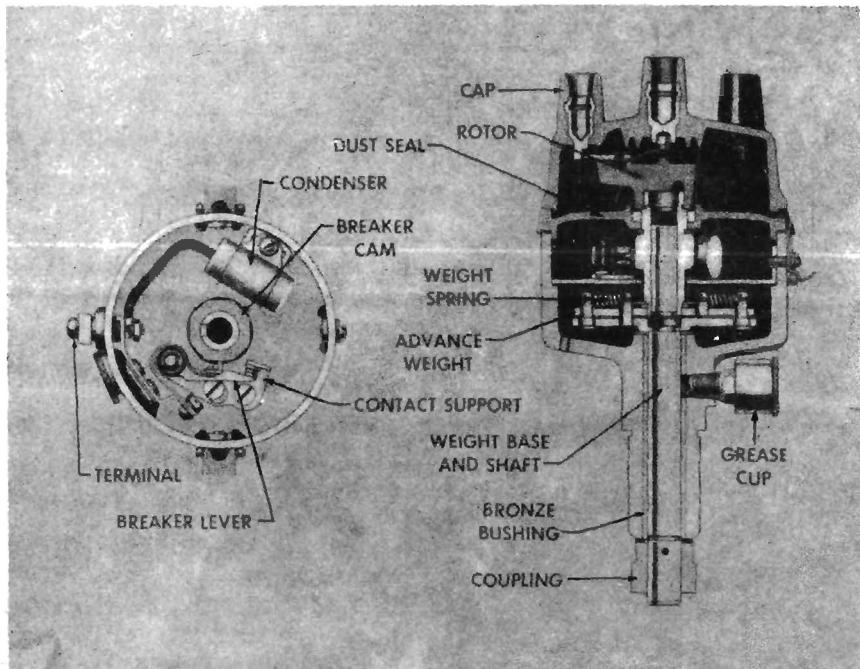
Ignition distributor housing (Courtesy of Delco-Remy Division, General Motors Corp.).
